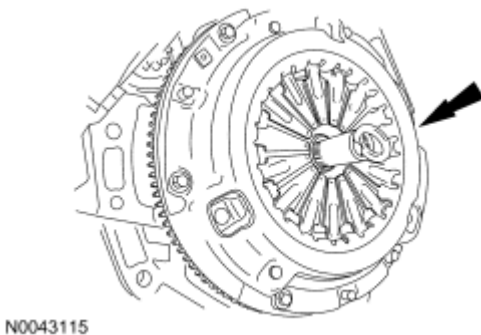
Locating Clutch Pressure Plate On Flywheel
